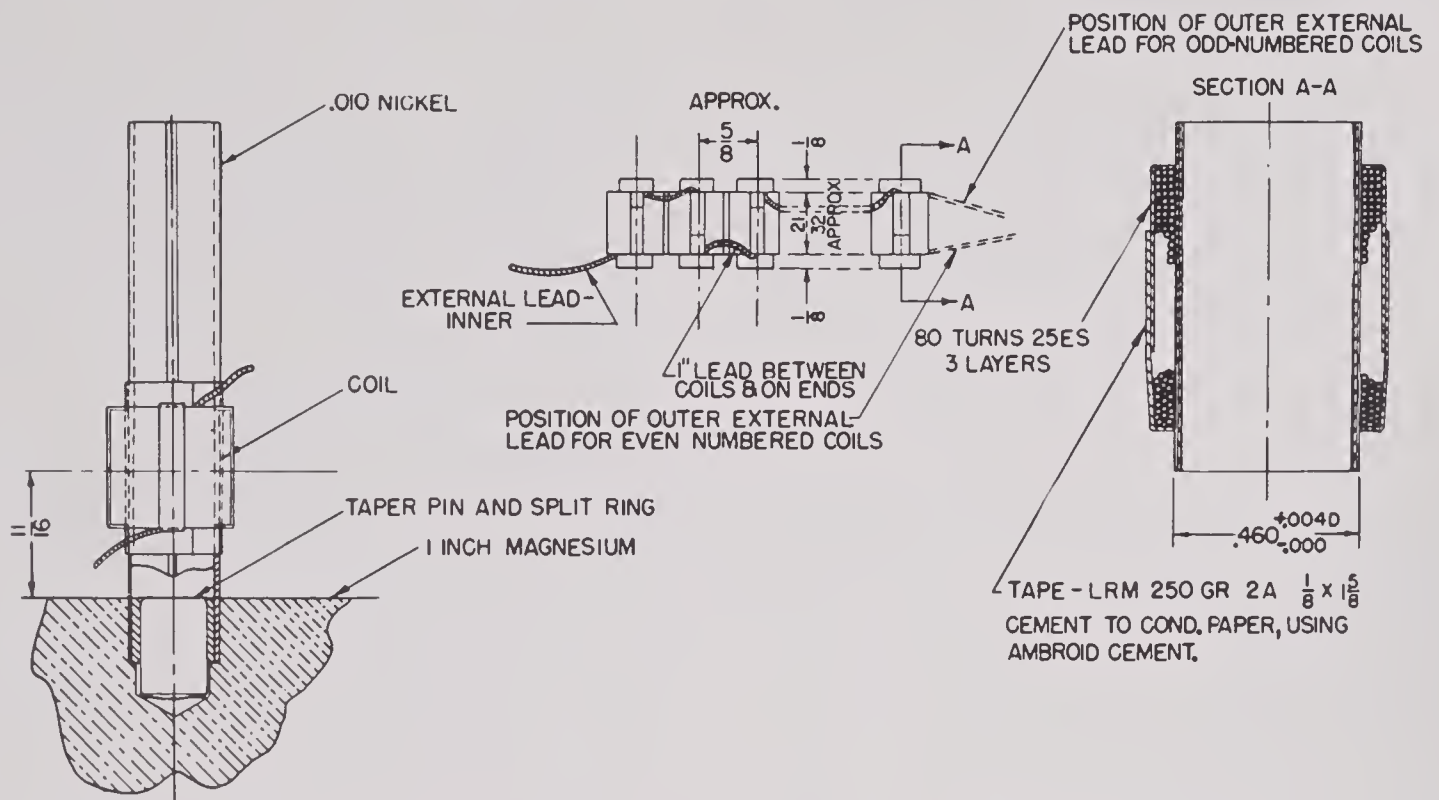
Details of tube-and-plate assembly for XI-100 (BTL).
